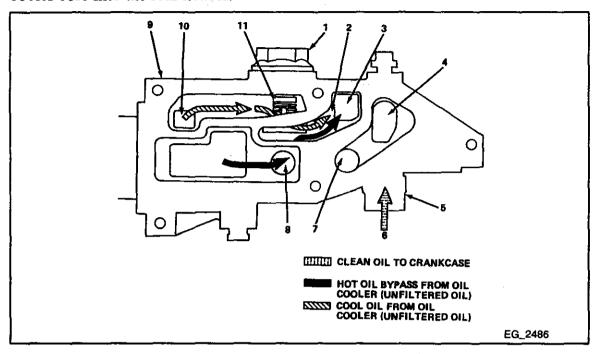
Oil Cooler Header Oil Flow Schematic
